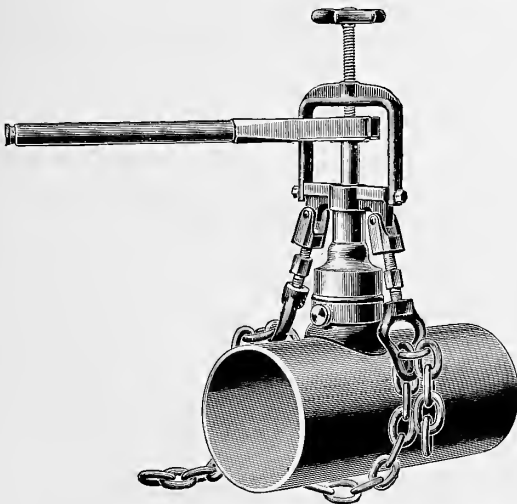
PAYNE'S DAISY DRY TAPPING MACHINE.
